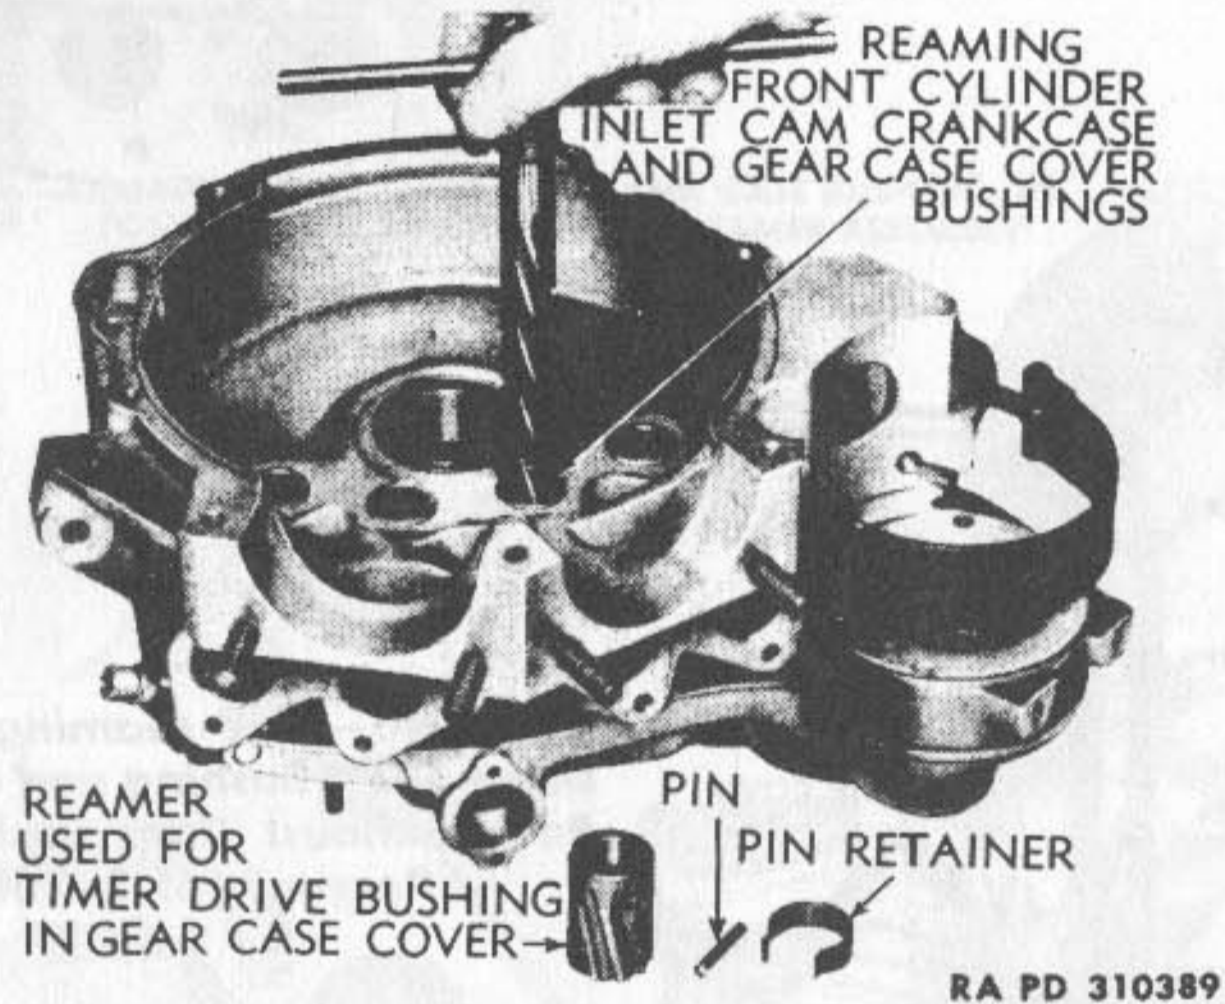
Line-reaming Front Cylinder Inlet and Exhaust Cam Bushings in Crankcase and Gear Case Cover with Reamer (41-R-2265)
